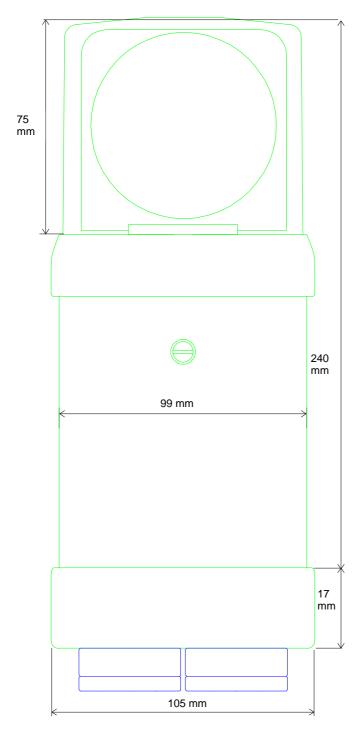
Dimensions of SeaKing DFP Profiler Head
